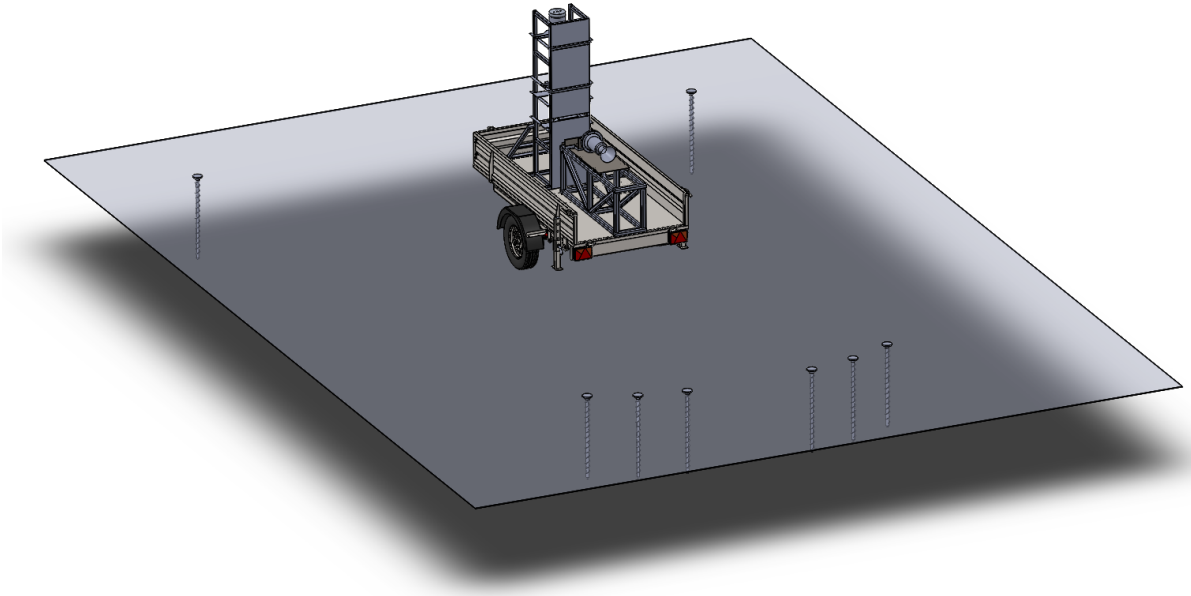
Test stand structure with ground anchor positioning ISO VIEW
